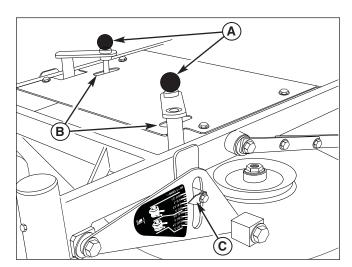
Remove the Cutter Deck Guard A. Cutter Height Adjustment Handle
